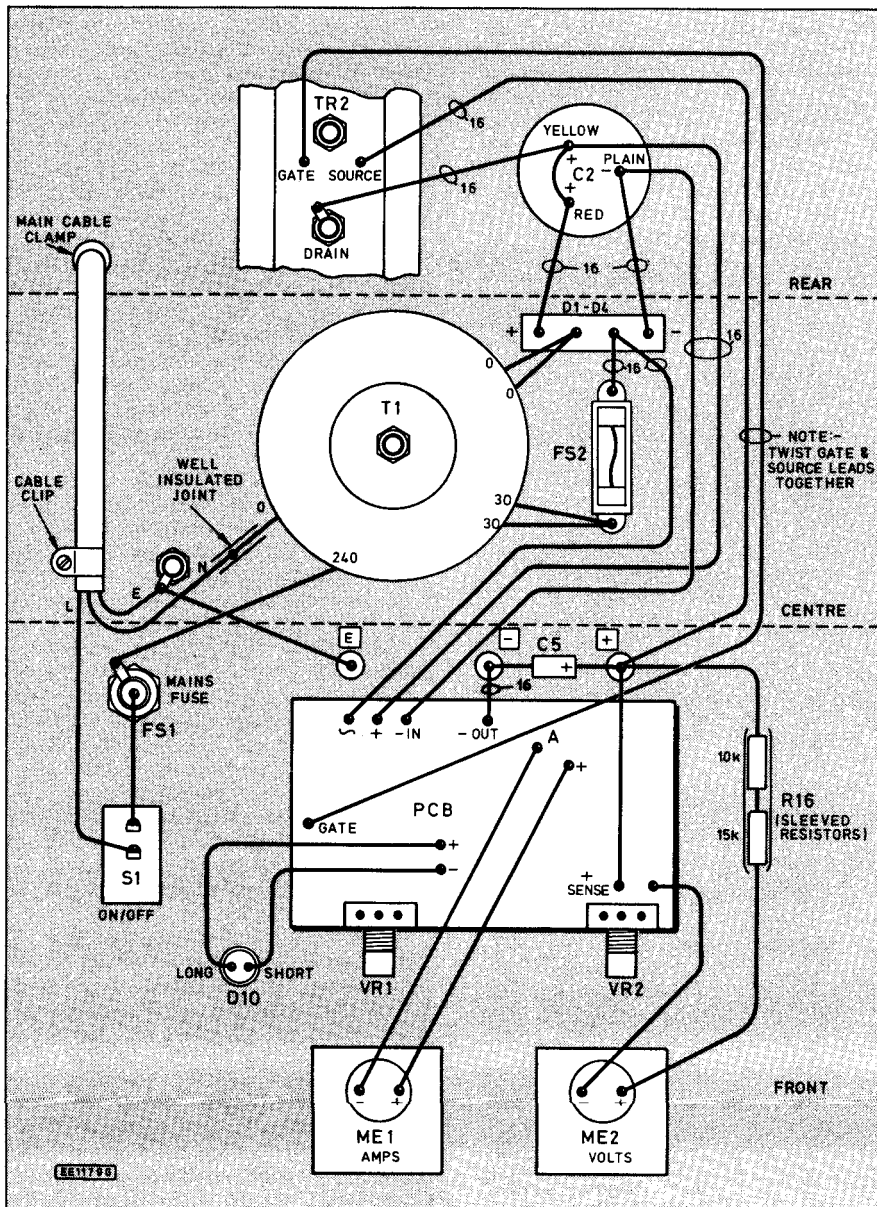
Full wiring and assembly details to the circuit board, transformer and case mounted components. Heavy duty wires which carry the full output current are indicated by the number 16.
